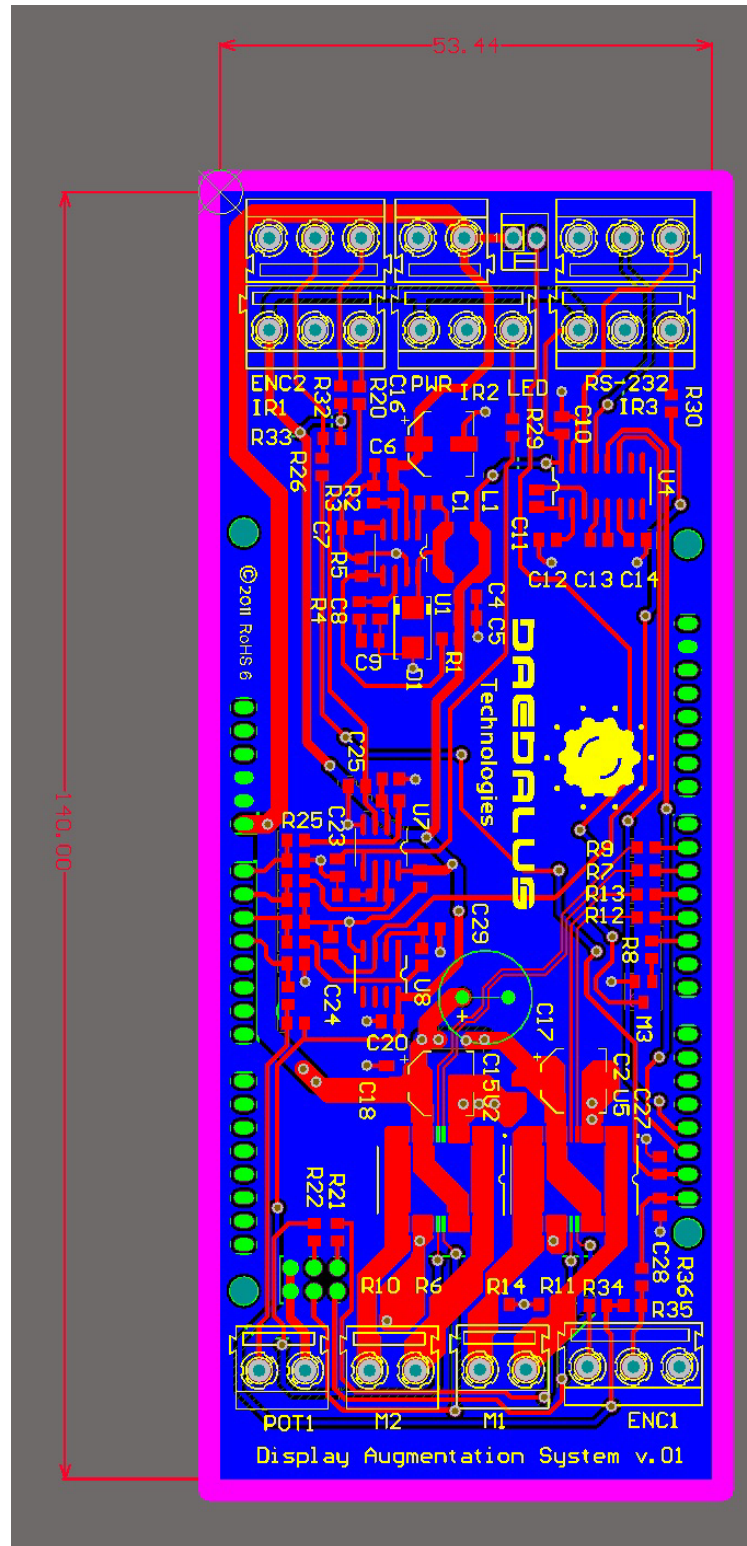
PCB Dimension(in mm) and Tracks
